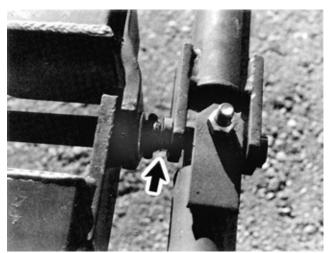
Spray Boom Universal Joint and Boom Pivot Pin.
